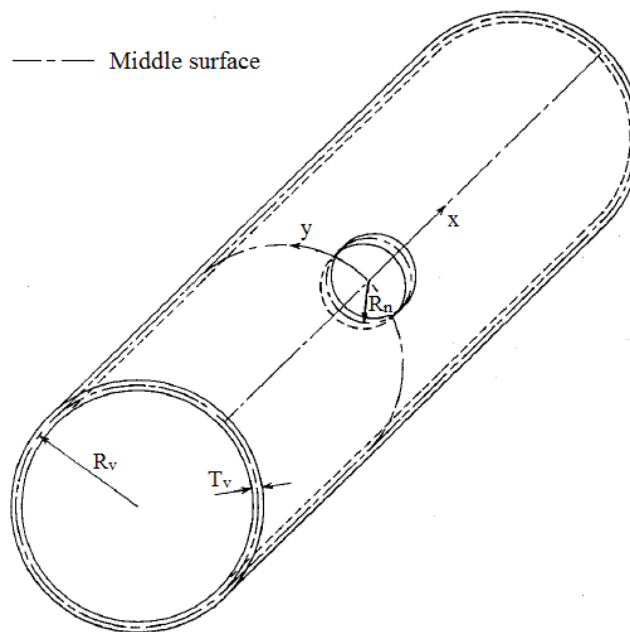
1: Cylindrical Vessel with a Circular Cutout
